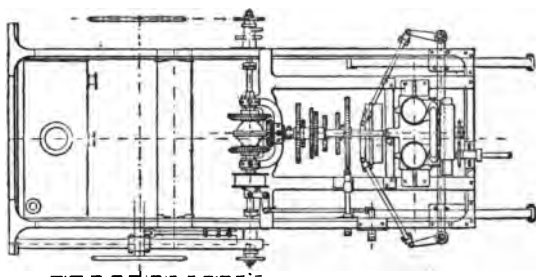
Panhard-Levassor Road Motor Car (Plan).
